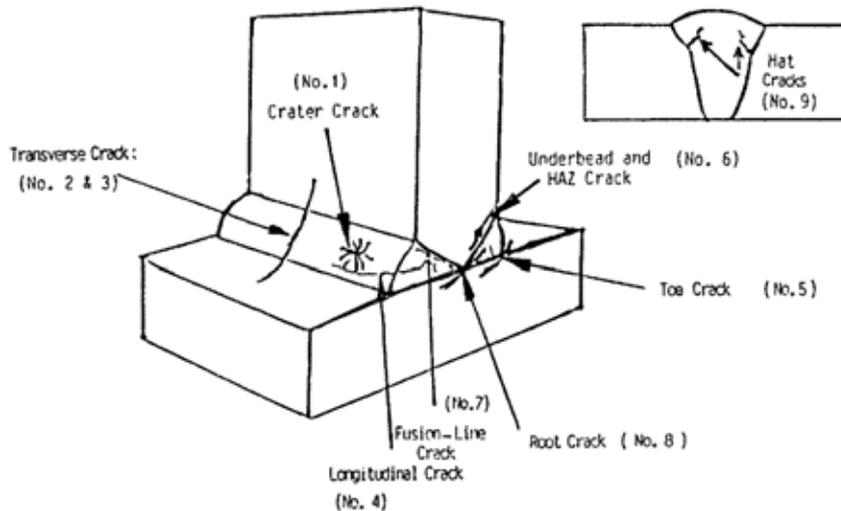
Different types of cracks located in and around a welded joint.
